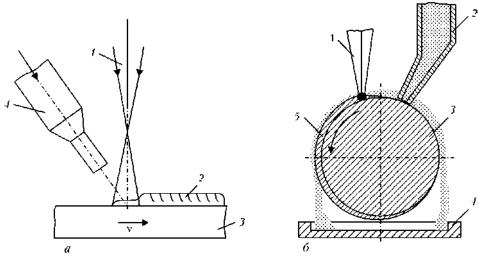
Schemes of laser coating processes: (a) parts of arbitrary geometry (1 - laser irradiation; 2 - cast iron; 3 - moving sample; 4 - base providing shielding gas and filler powder) [1] and cylindrical parts (b) (1) - laser radiation; 2 - powder transmission line; 3 - deposited sample; 4 - container for unused powder; 5 - molten coated metal)
